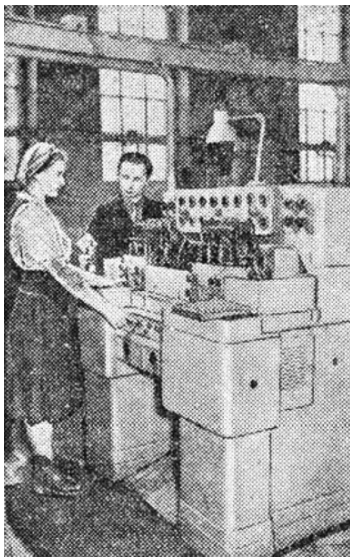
Eight-spindle electrospark machine for grinding the housing of the fuel pump sprayer of a DT-54 tractor.
